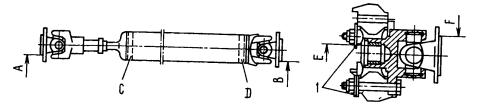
Balancing Propeller Shafts: 1 - balancing washers; A, B, E, F - balance check
